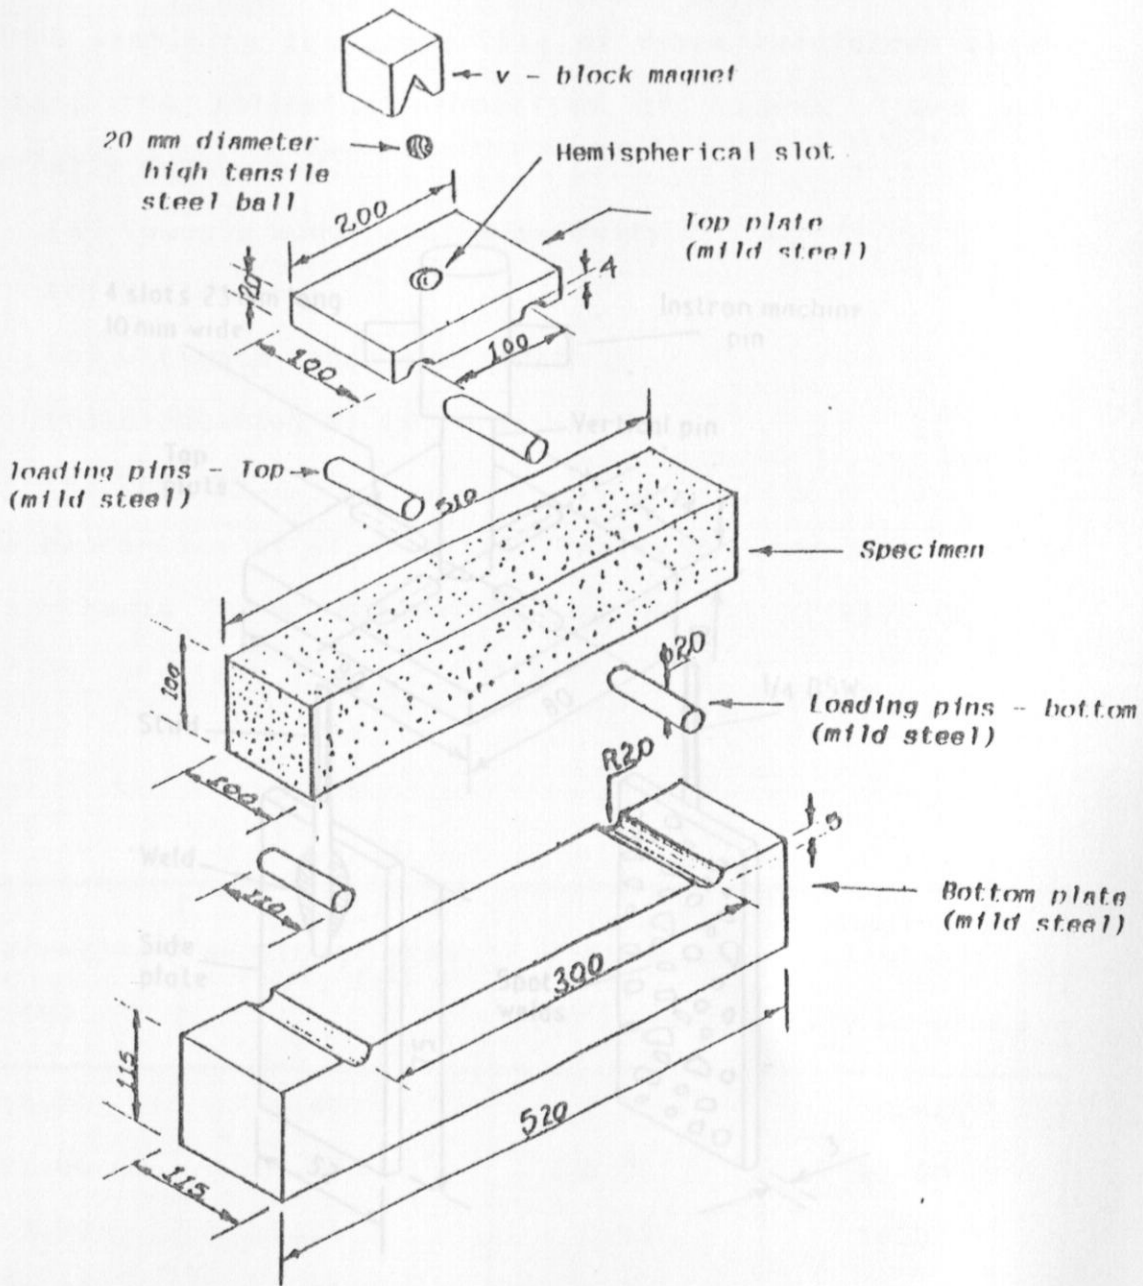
The flexure test rig showing the test arrangement (dimensions in mm).
